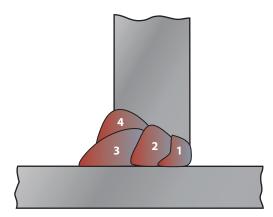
FCAW weld bead positions for a 100% penetration grooved tee joint.
